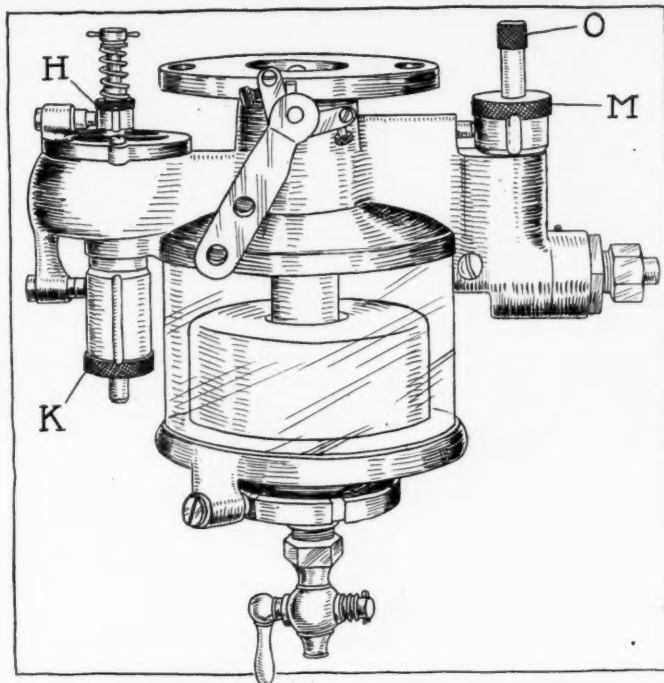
Illustrating the adjusting points on B-type Stromberg carburetor
